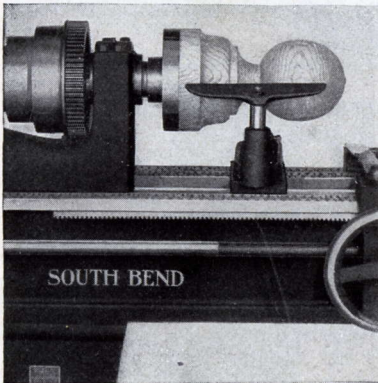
shows a wood pattern being made on the lathe. The screw cutting lathe can be used for wood turning.
